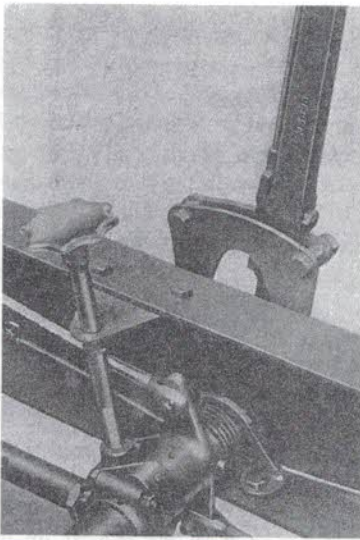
The Central Brake Adjusting Screw, which protrudes through the floor boards.
